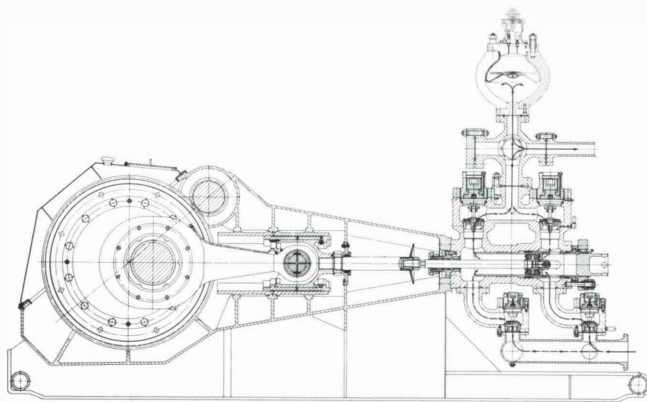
Sectional drawing of a 2-cylinder double effect piston pump
